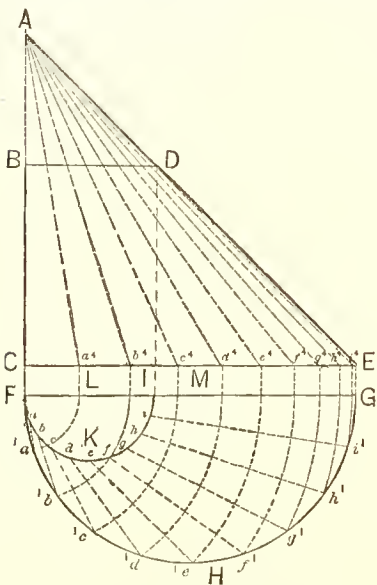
Elevation and Plan. An Irregular Flaring Article, both Top and Bottom of which are Round, the Top being Smaller than the Bottom, and Tangent at One Point in Plan.
